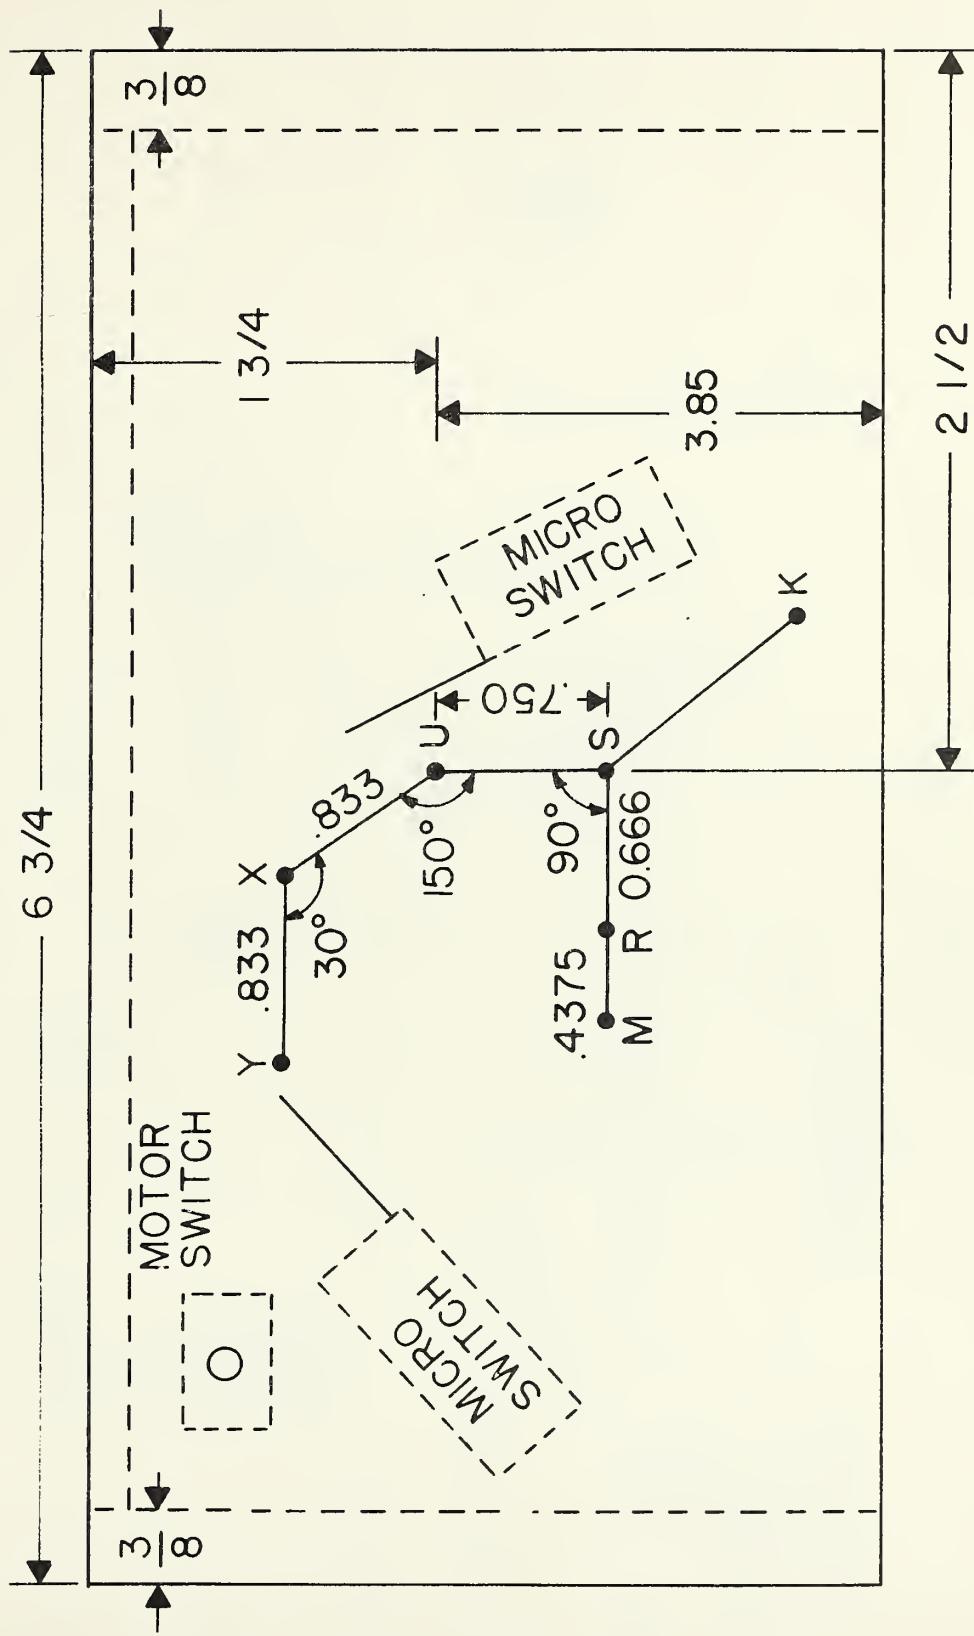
B. Specific shaft locations of monochromator wavelength gear drive assembly.
